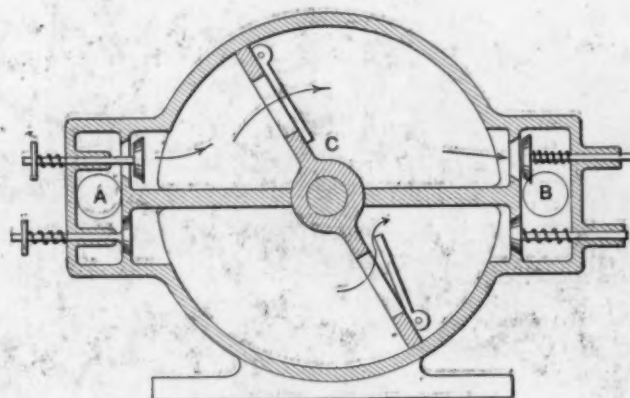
OSCILLATORY PUMP WITH VALVES.
